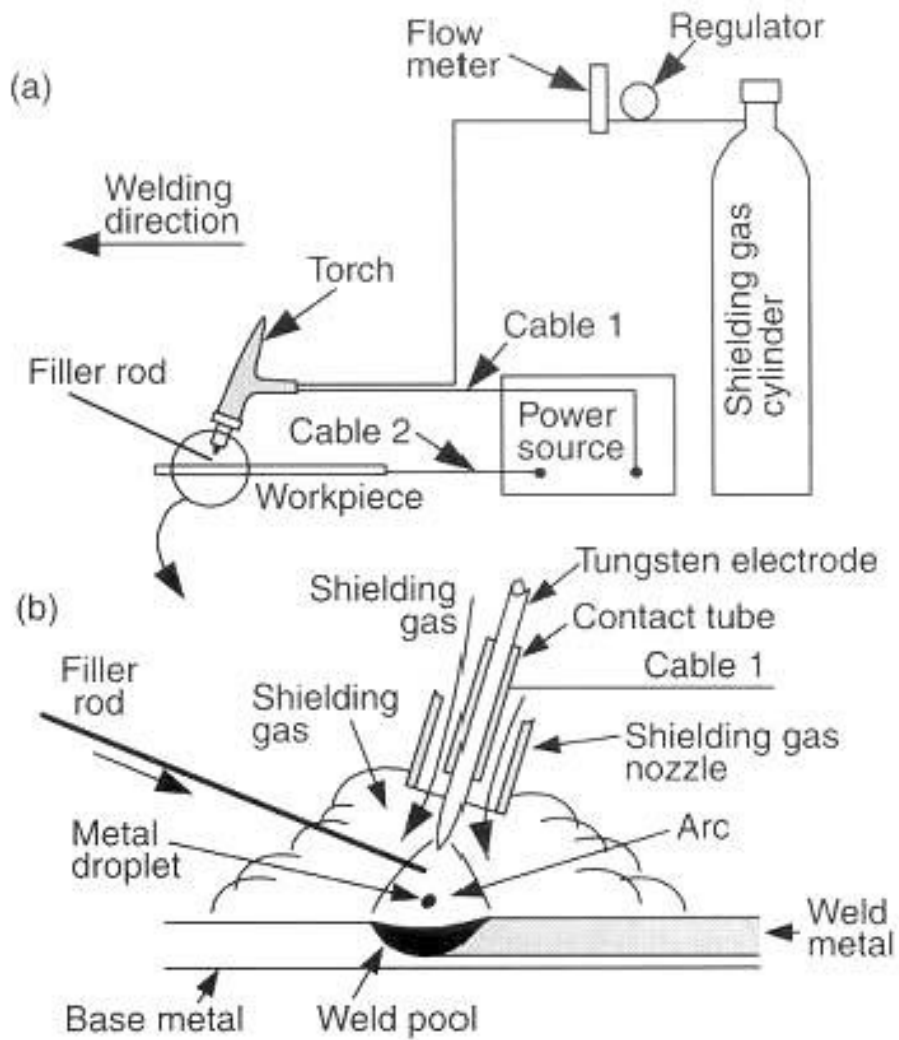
4: Gas Tungsten Arc Welding: a) overall process, b) welding area enlarged
